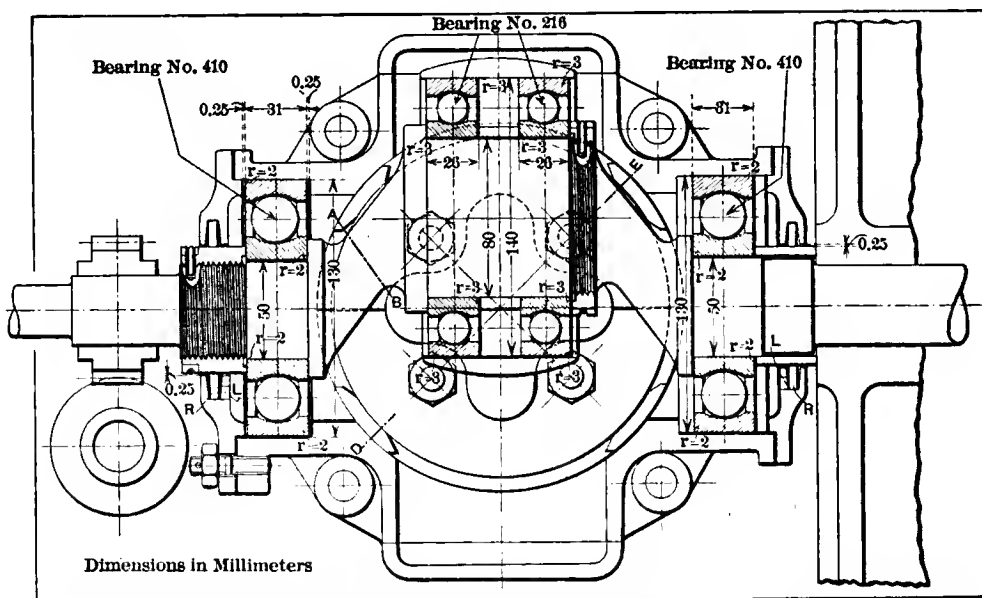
Cross-section through crankshaft, depicting the manner of applying ball bearings
